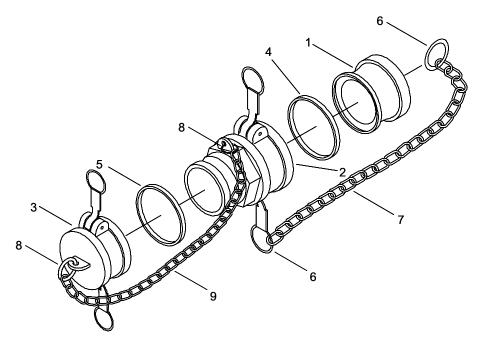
4 In. Male X 3 In. Female Reducer Assembly.
